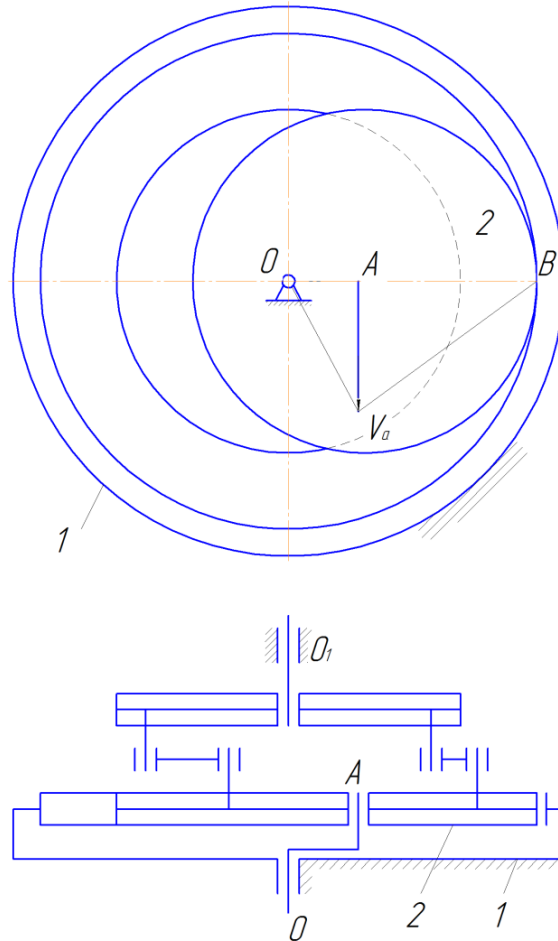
Design scheme of eccentric gearing: 1 – tooth-wheel with internal gearing; 2 – satellite.
